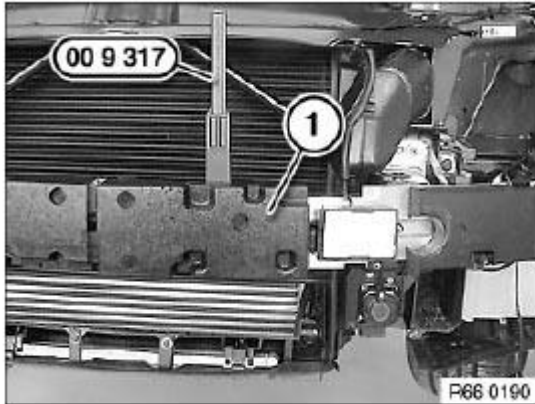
Identifying Impact Absorber With Special Tool 00 9 317
